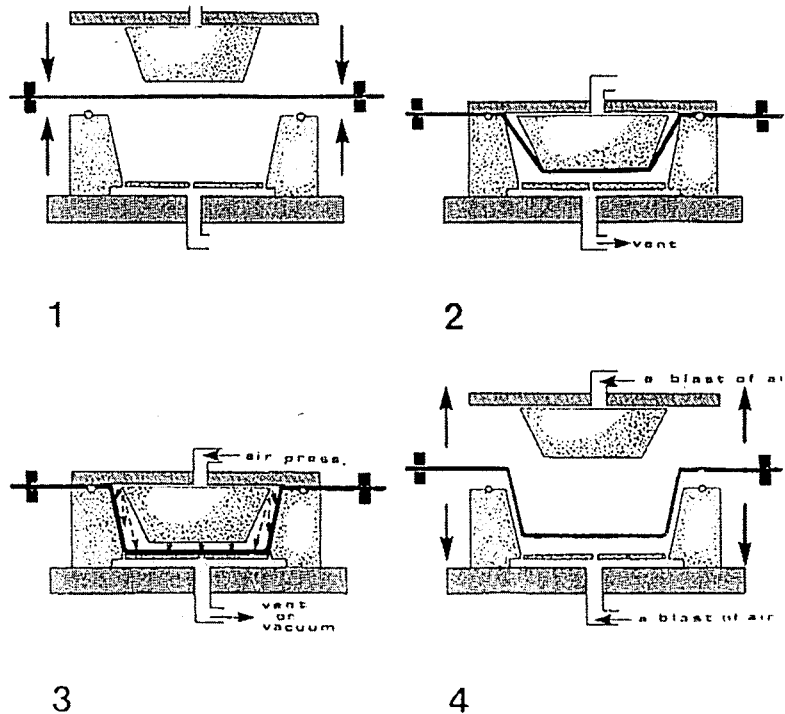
Plug Assist Thermoforming: (1) Sheet Clamping, (2) Prestretching, (3) Forming, (4), Mold Opening and Stripping [2]
